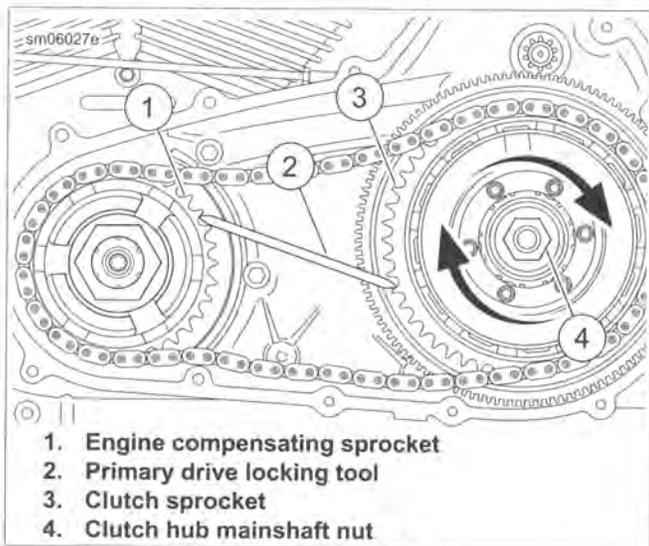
Removing Clutch Hub Mainshaft Nut
